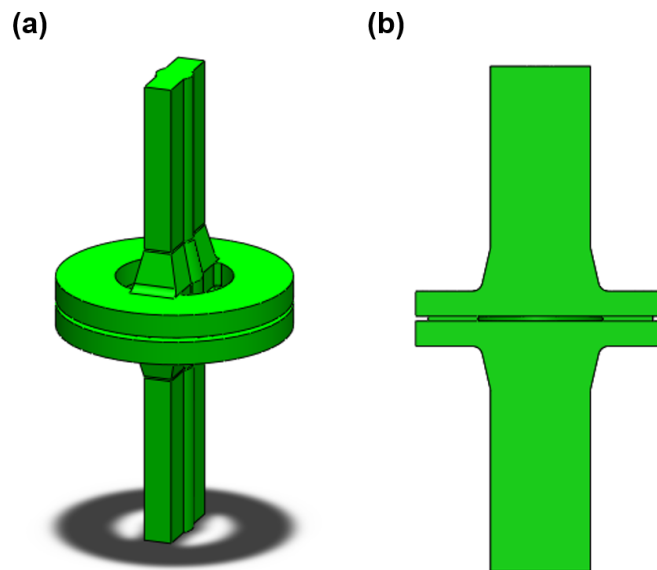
CAD model of Solid SEE with arm fittings. (a) Isometric view. (b) Section view.
